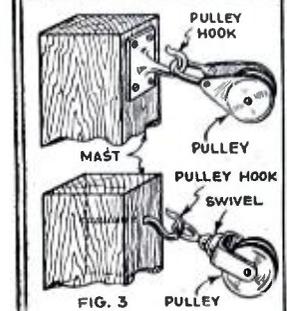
Top view of the mast pulley-hook and assembly. A good pulley supporting band can be made from a regular ground clamp. Slip the pulley eye over the bolt used to hold it before the bolt is put through the band itself. It is usually best to mount the pulley and halyard on the pole before erecting it.
